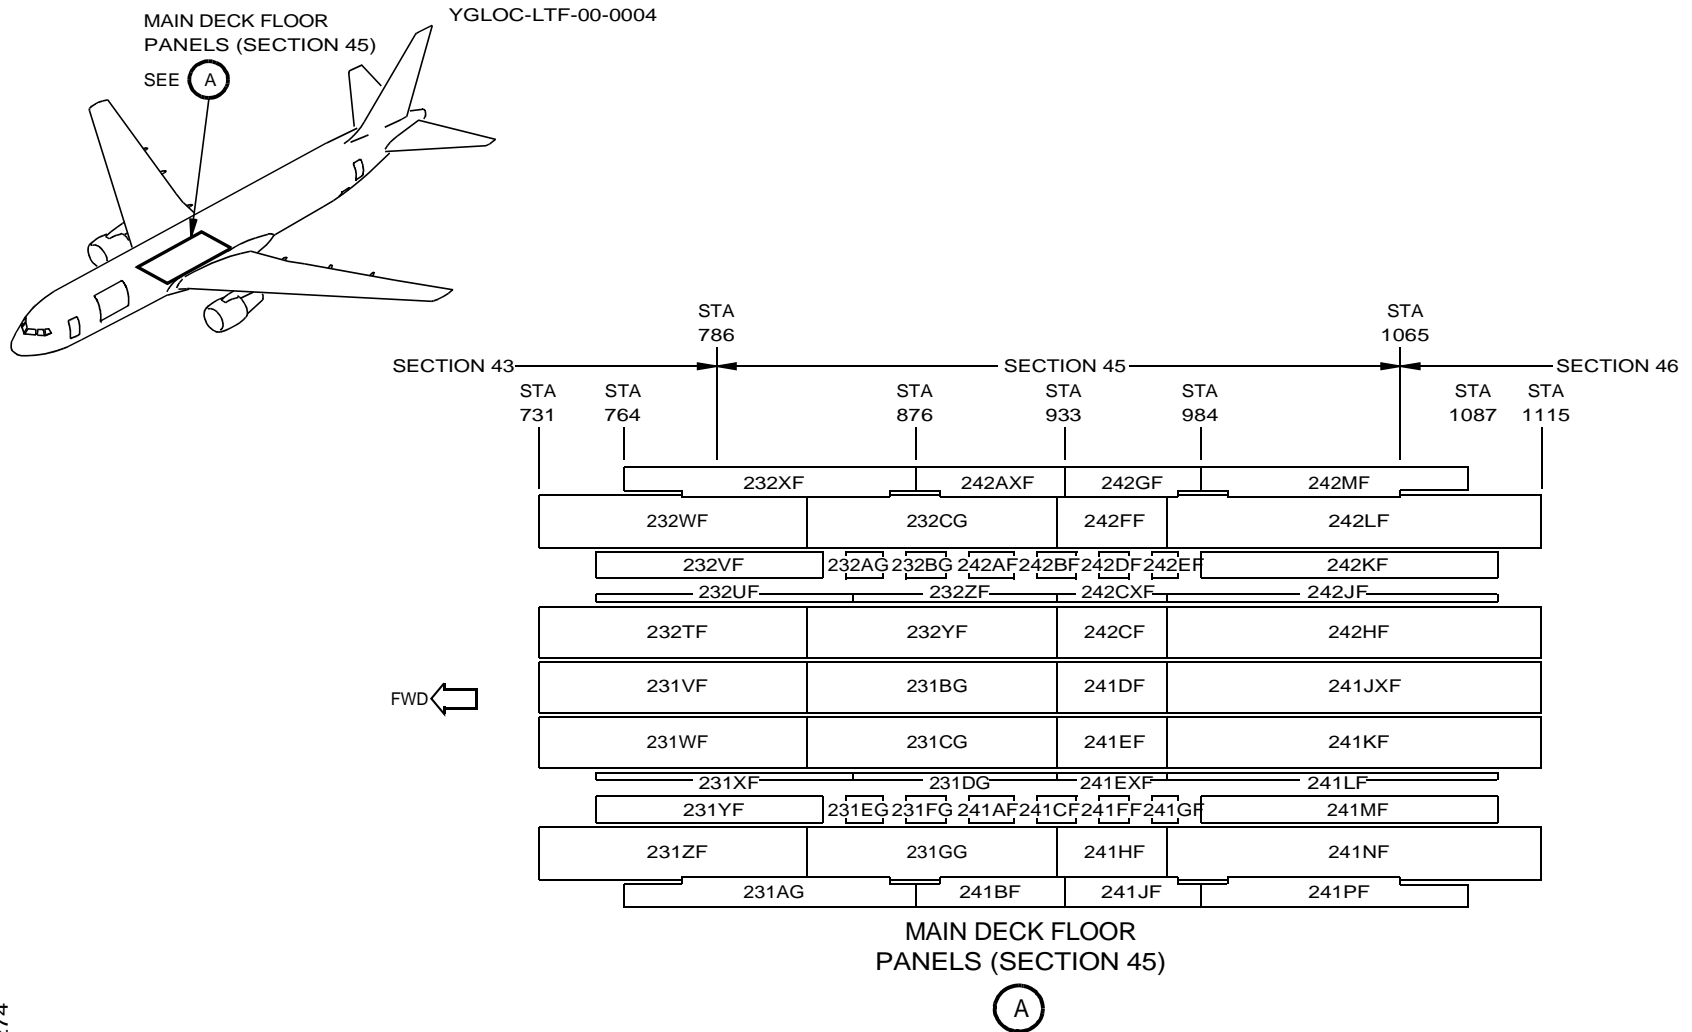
767-300BCF MAIN DECK CARGO FLOOR PANELS
